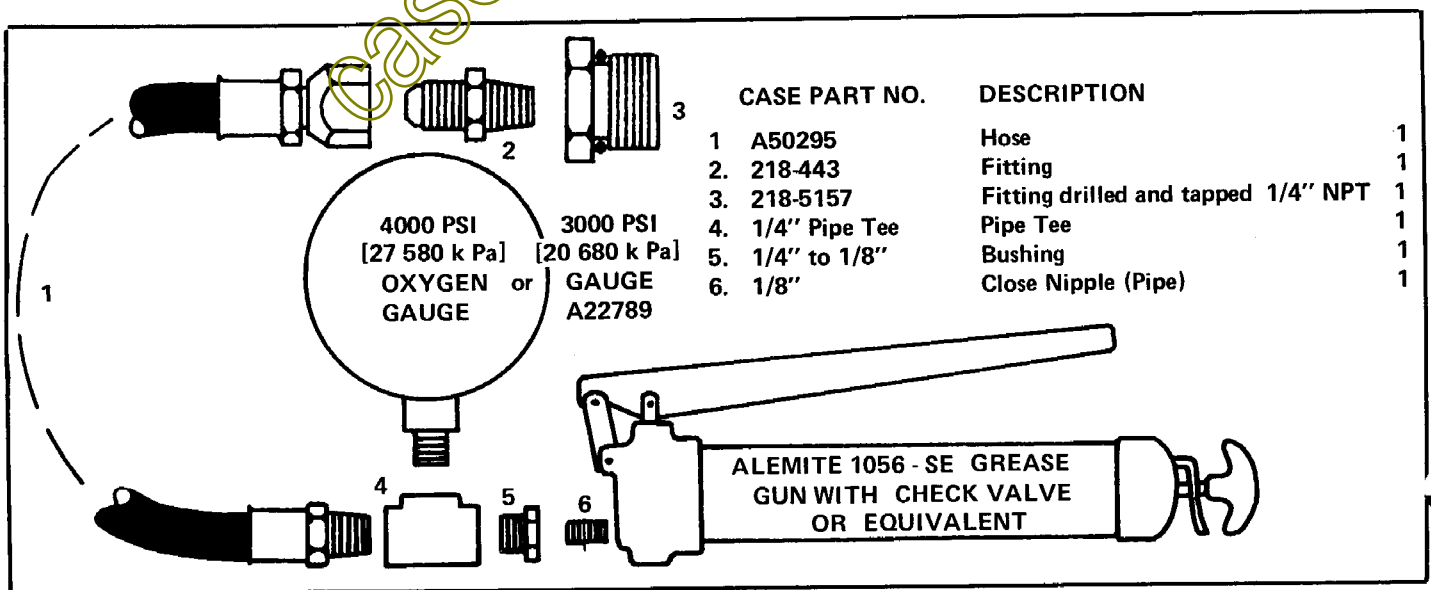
Grease Gun and Fittings to Check Relief Valve Cracking Pressures
